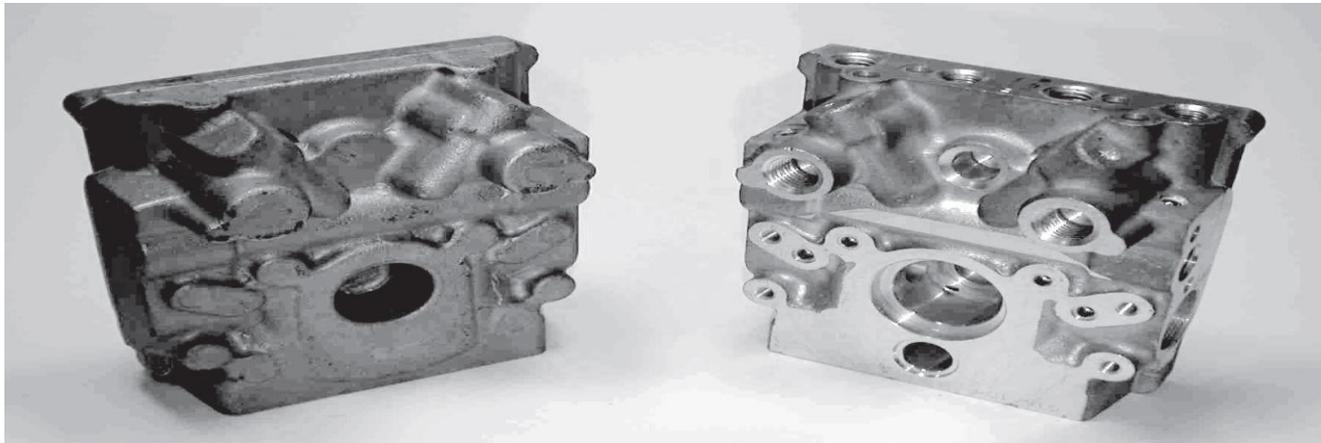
This body for a hydraulic valve assembly was first cast from aluminum (left) and then machined in order to produce holes, flatten surfaces, and cut threads (right).
